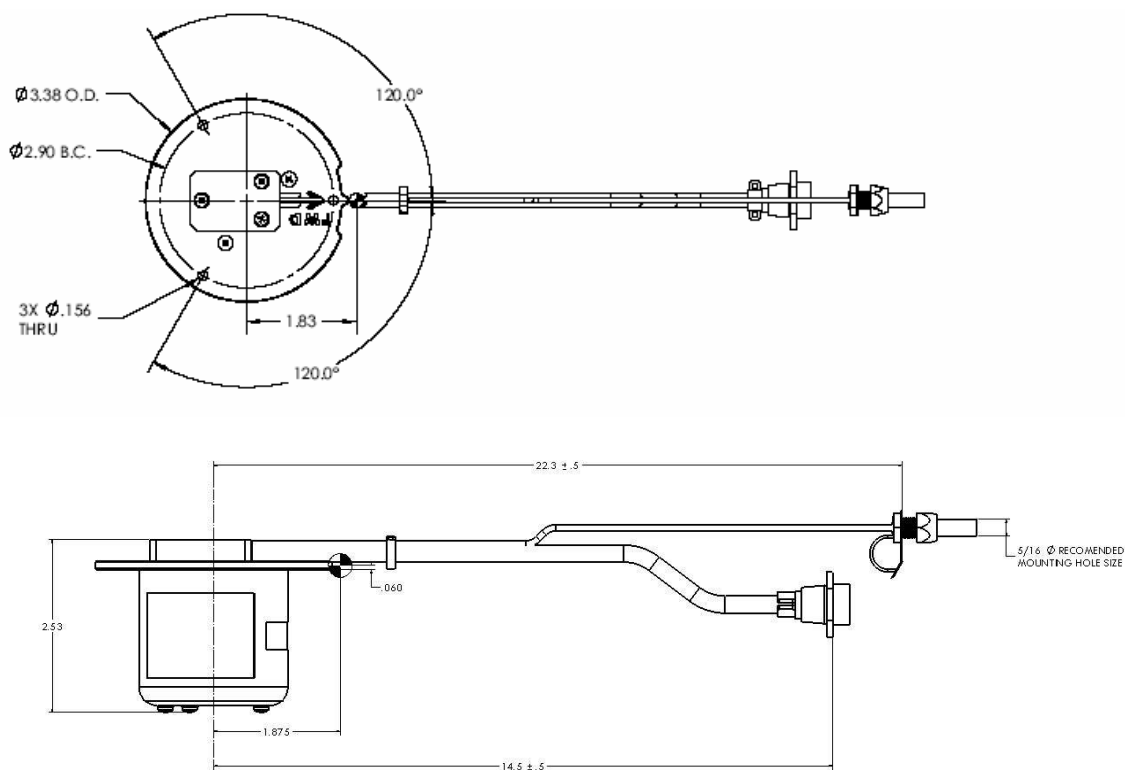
Magnetometer/OAT Sensor Outline Dimensions
